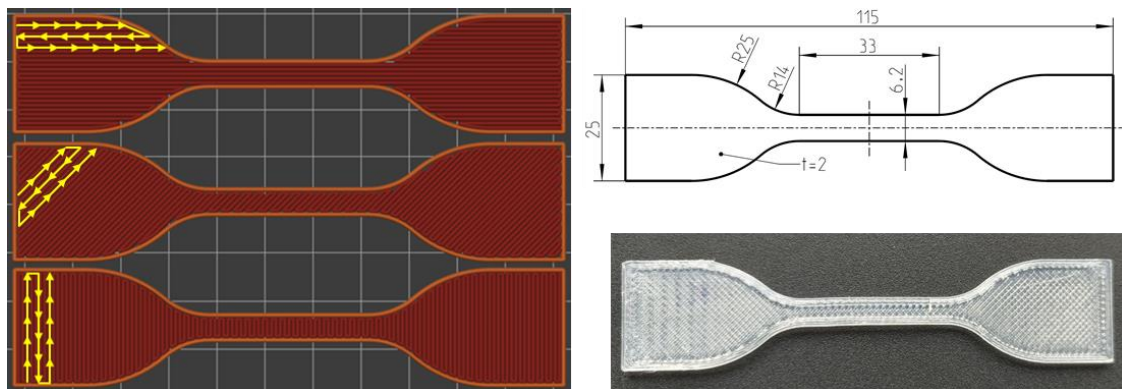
Infill angles of 0°, 45° and 90° (left), sketch of tensile specimen according to ISO 37 Type 1 (top right) and printed tensile specimen (bottom right)
